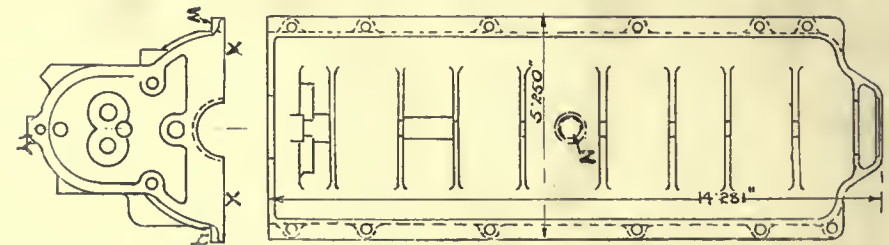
MILLING FIXTURE FOR CRANK CASE.
